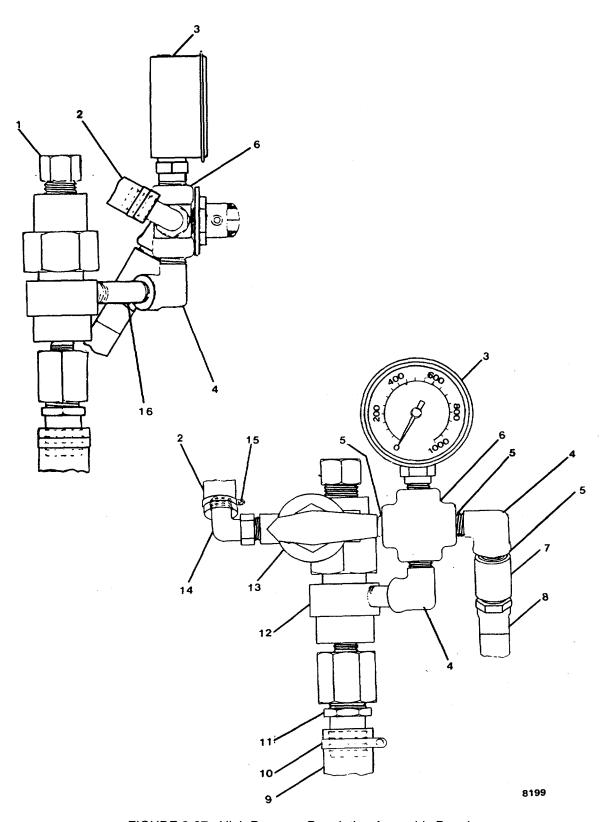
High Pressure Regulating Assembly Repair.
